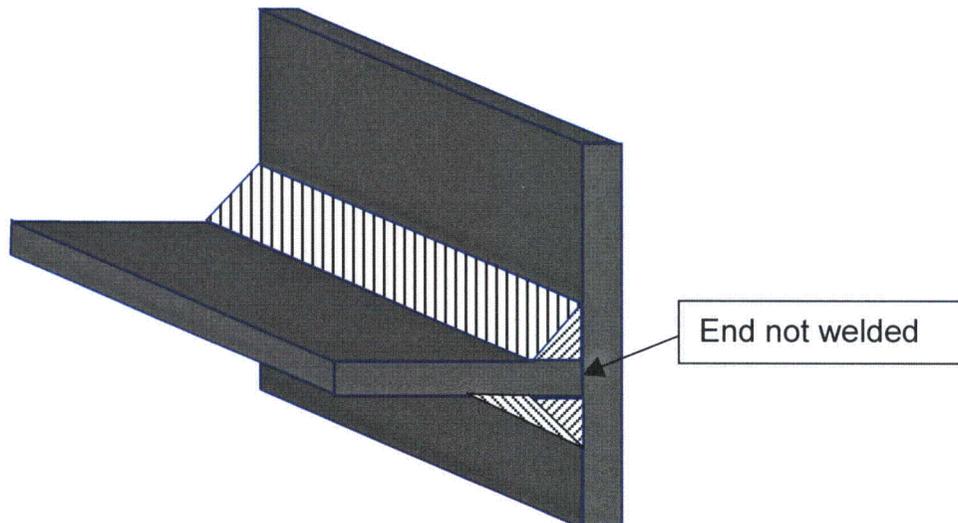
Two sided fillet weld not welded all the way around.
